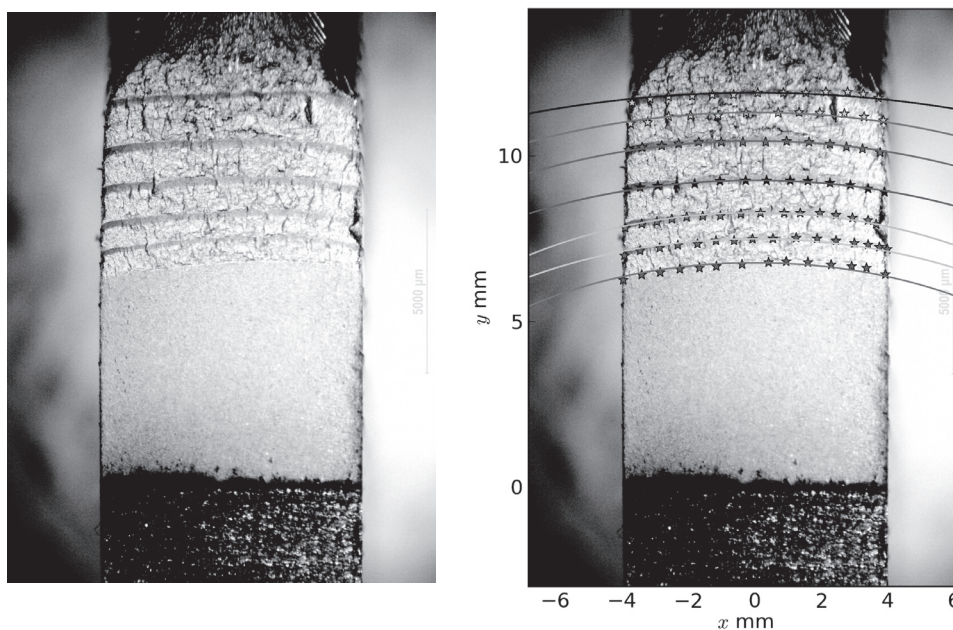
The fatigue crack surface of specimen $B=8.0$ mm, $F_{\max}=12$ kN.
